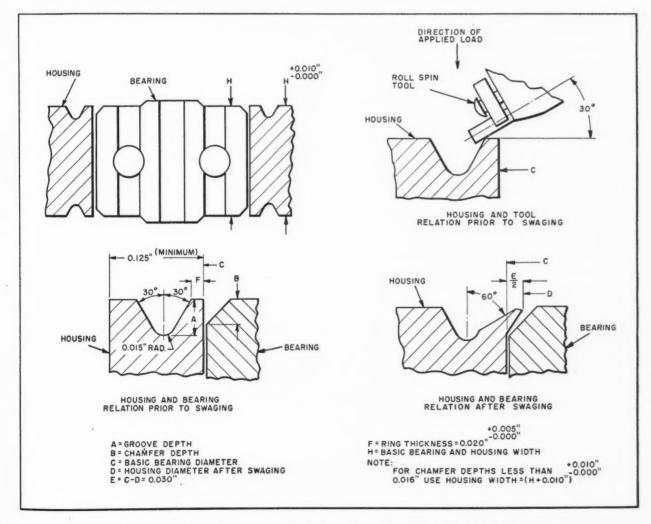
Design details recommended for the roll-swaging process of retaining bearings. Dimensions for various housing materials are given in accompanying table.
